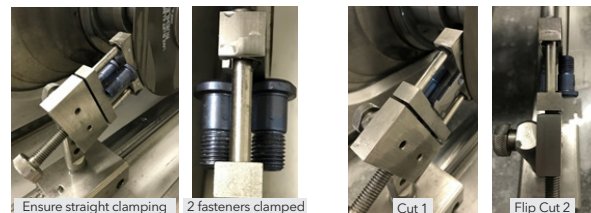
Illustrates sectioning challenges attributed to clamping on a precision sectioning machine
